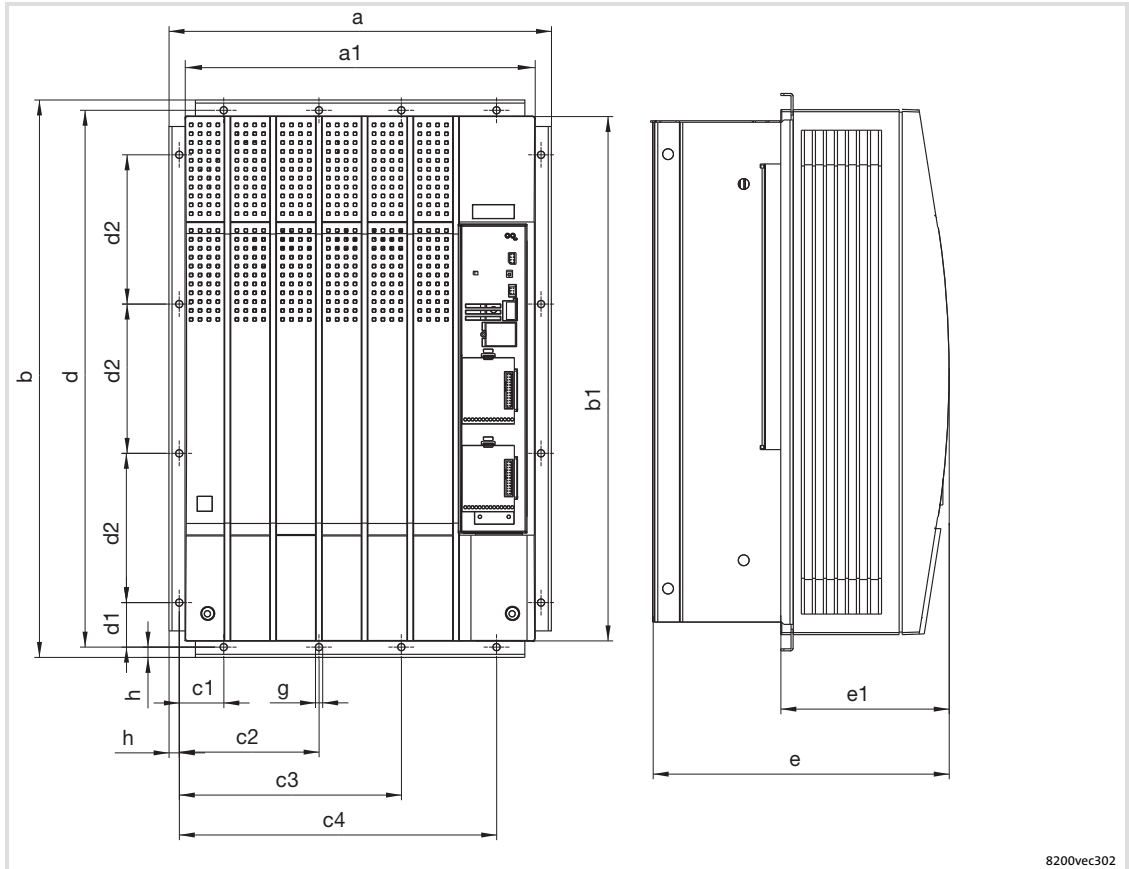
Dimensions for thermally separated mounting 45 kW
